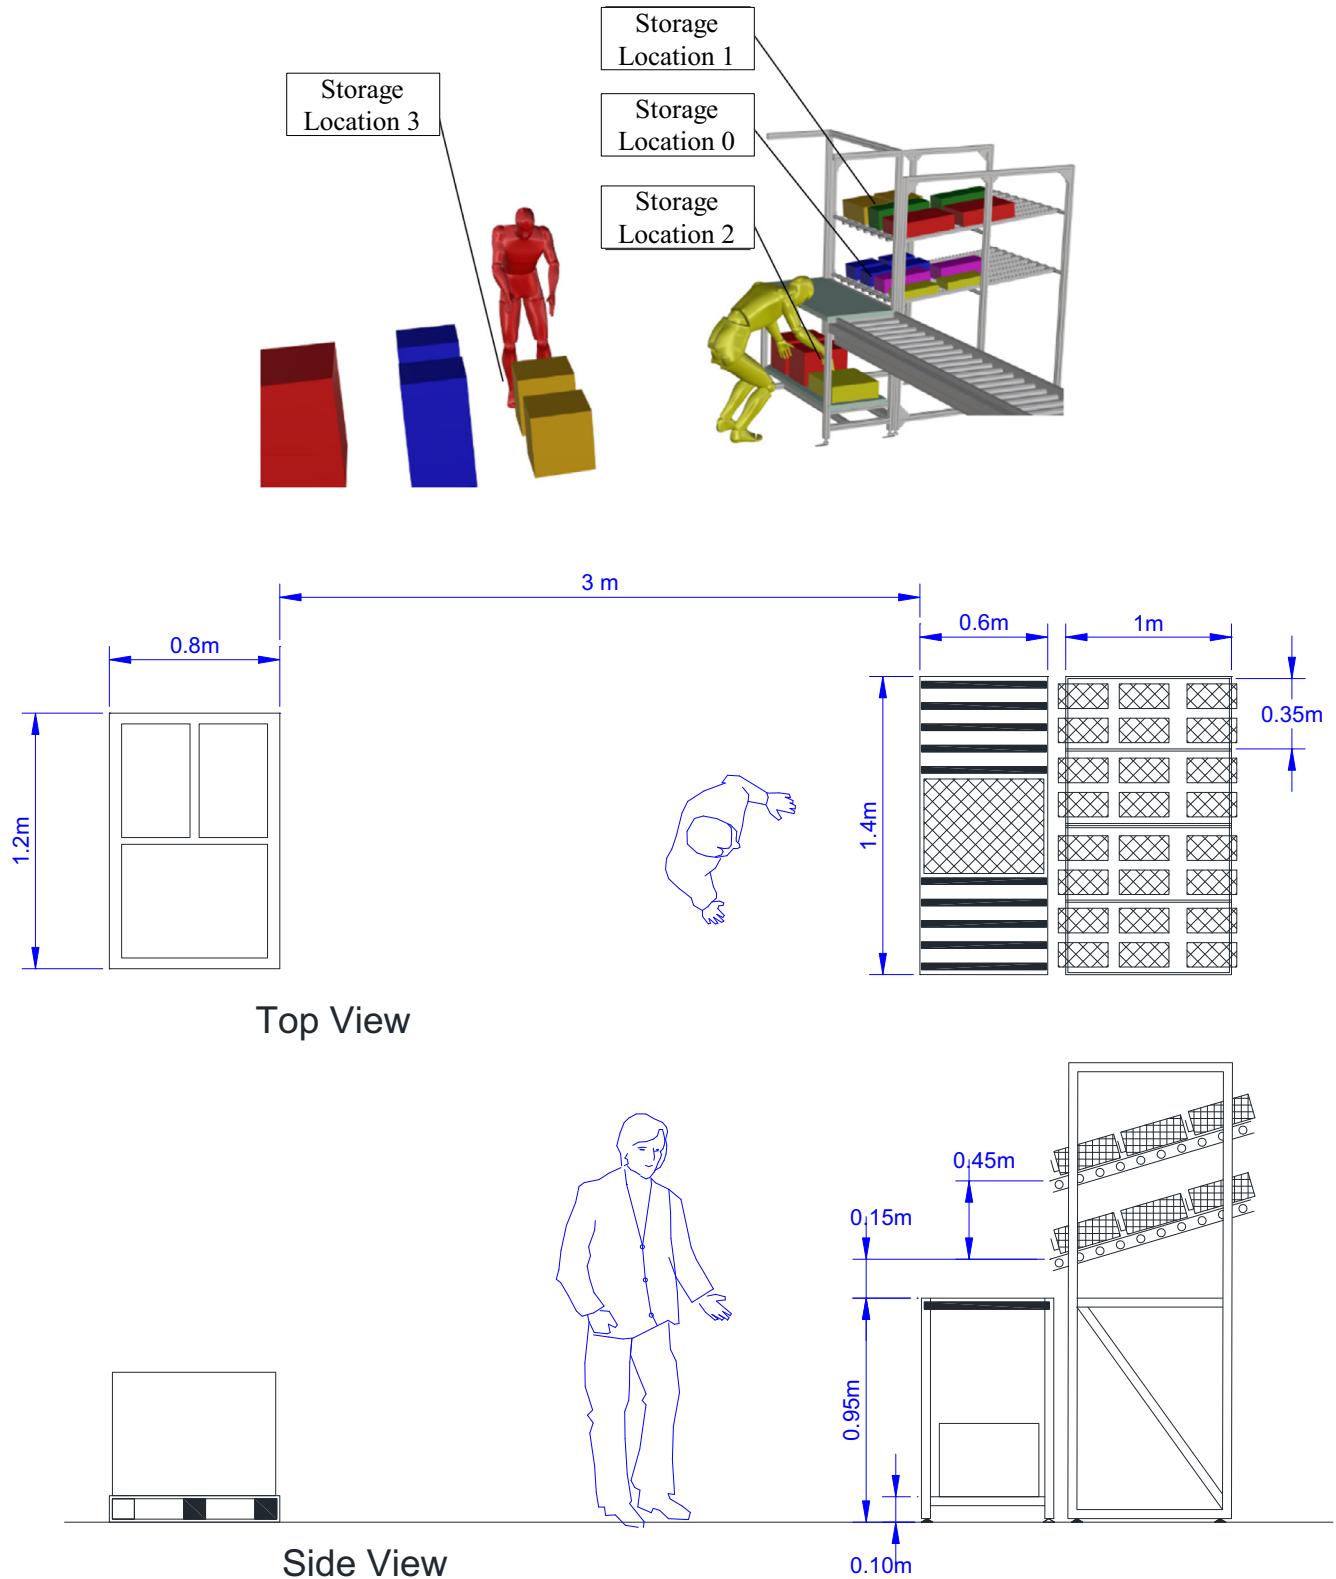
Typical component storage locations at assembly station level (a). Top (b) and side (c) views with geometrical dimensions.
